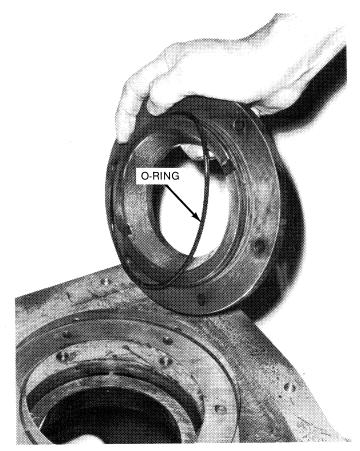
Reverse Bearing Retainer and O-ring Removed.
